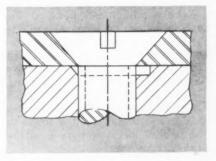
In the assembly method shown in this sketch, the thin or attached member has a thickness equal to or approximately the same as the thickness of the screw head.
